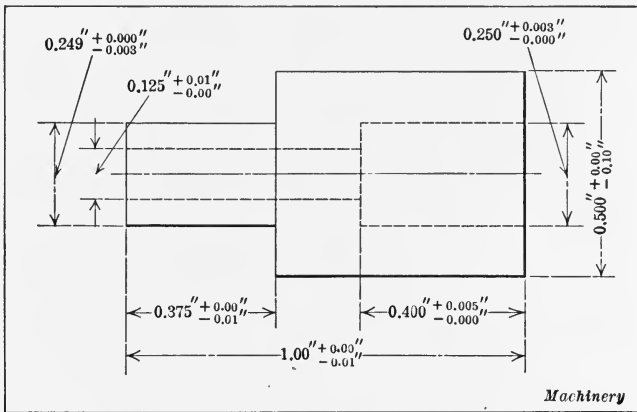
Drawing of Stud machined in One Operation on a Screw Machine
